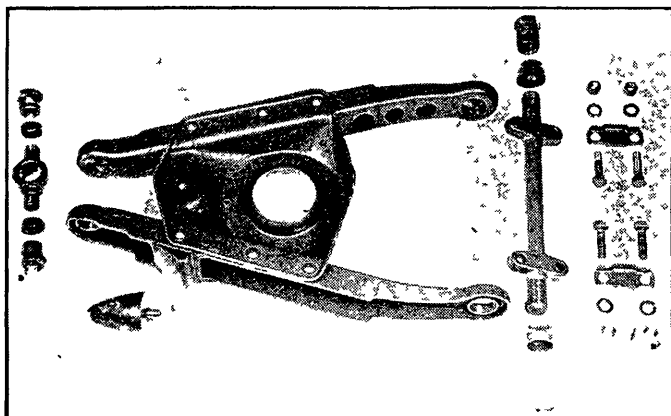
Layout of lower control arm parts on 1950-51 Statesman and Ambassador
